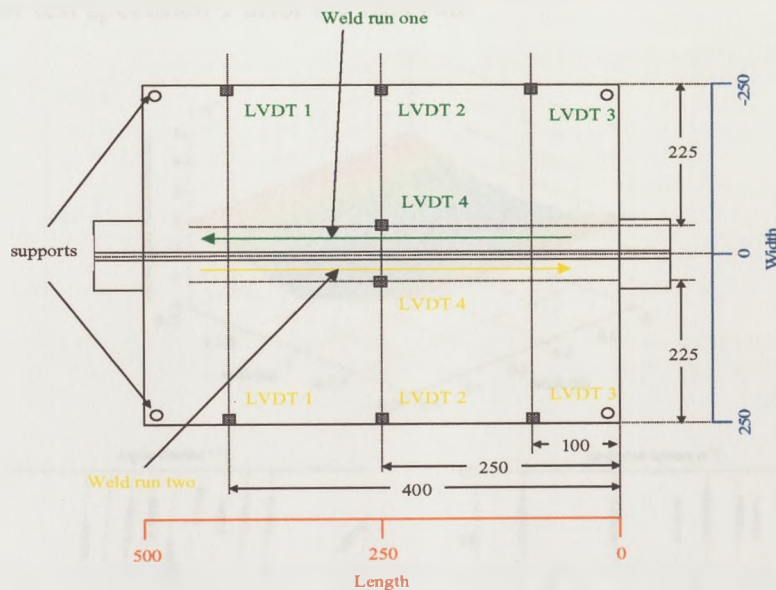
Positions of linear-variable displacement transducers and supports for double sided fillet welding pilot tests
